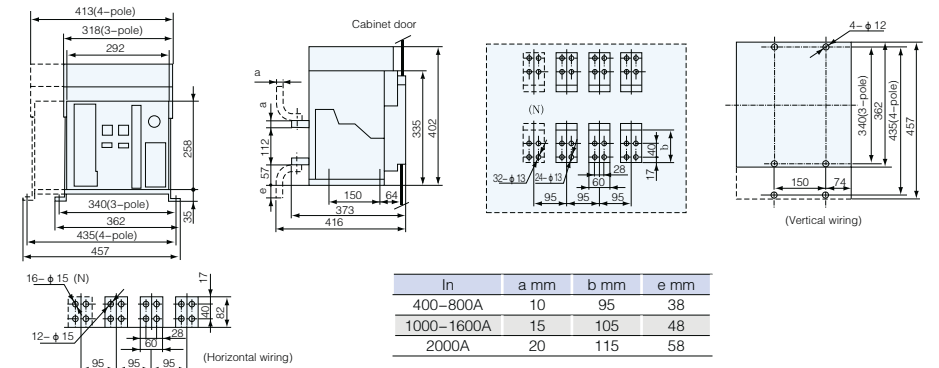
overall and mounting dimensions of fixed type breaker (OW18-2000, 2000/4)
